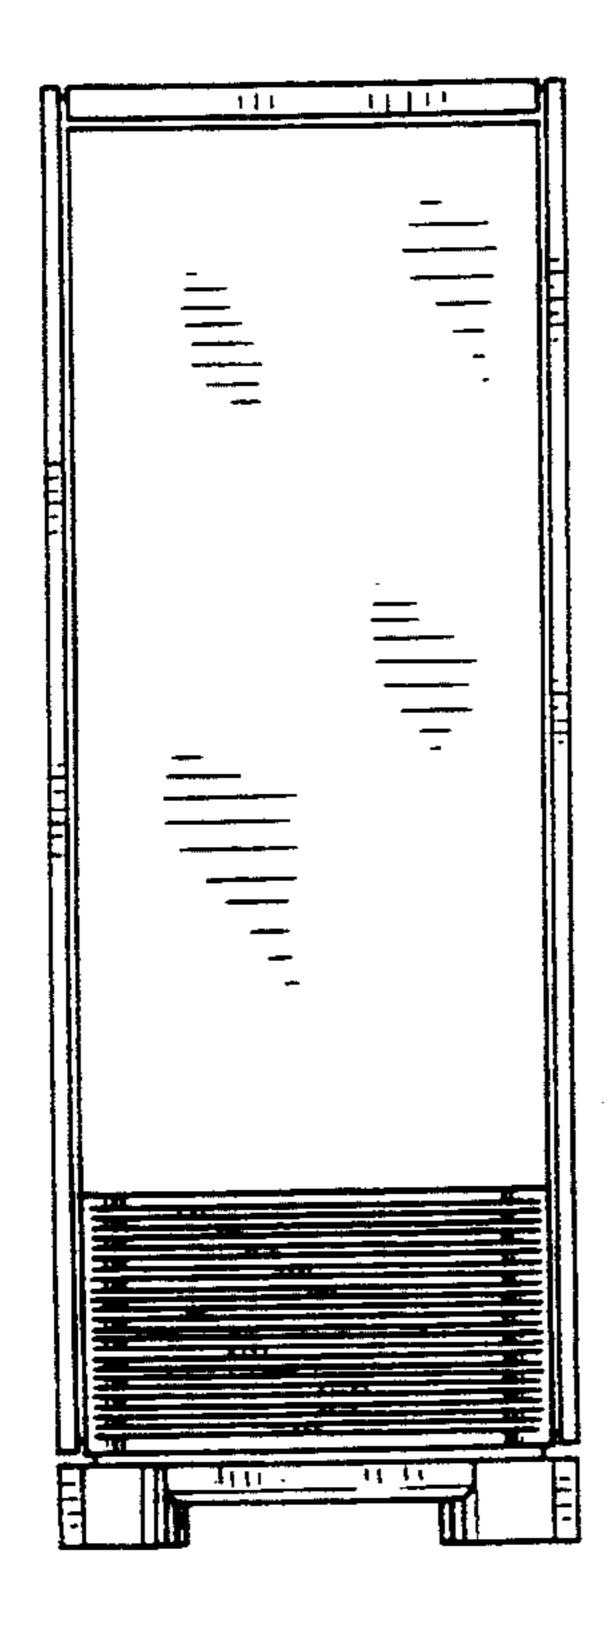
is a right side elevational view of the embodiment of FIG. 1. The left side elevational view of the embodiment of FIG. 1 is the mirror image of FIG. 2; FIG. 3 is a rear elevational view of the embodiment of FIG. 1;
